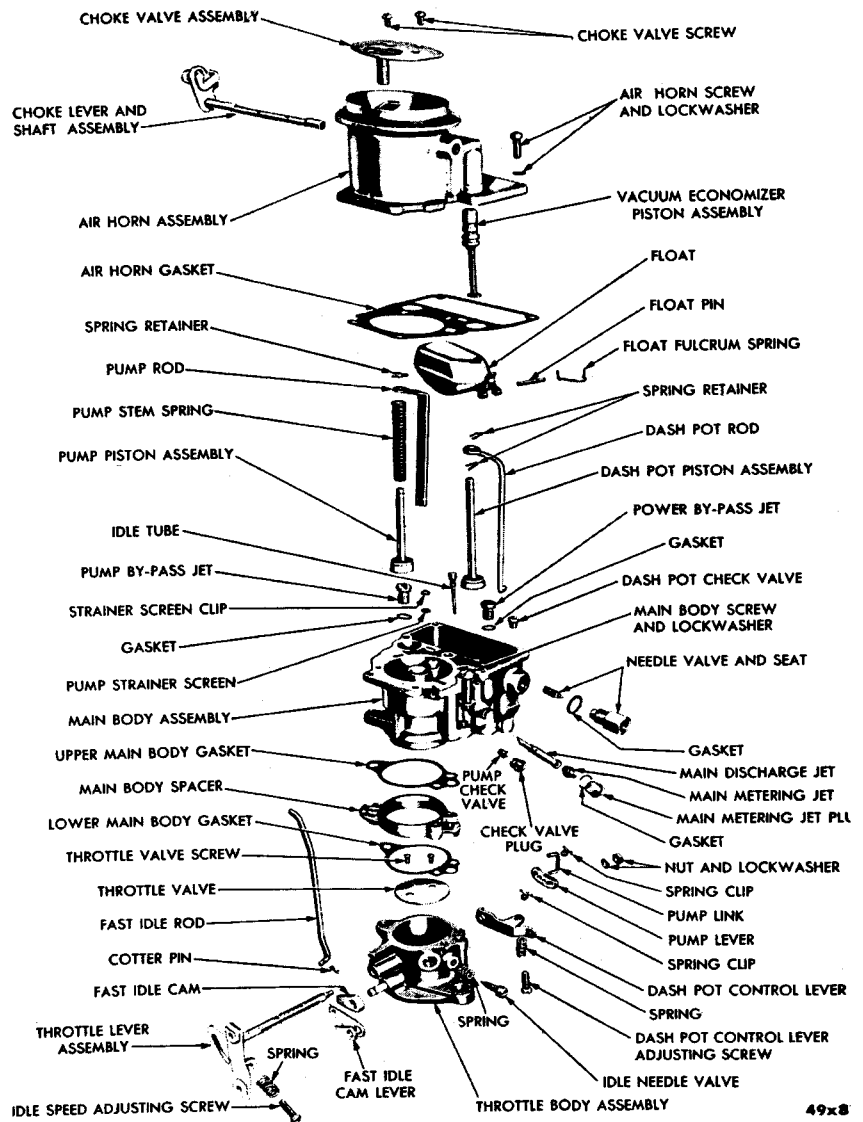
Downdraft Carburetor Used with Dash Pot and With Fluid Drive
